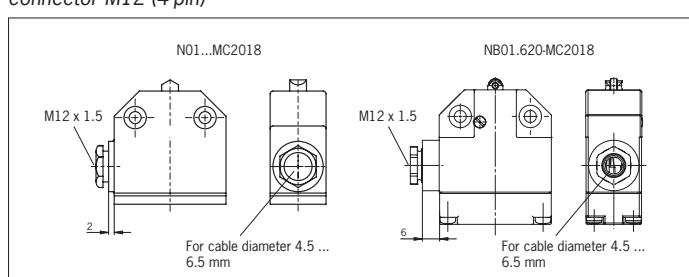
Dimension drawing for N01...MC2018/NB01.620-MC2018 with special cable gland
